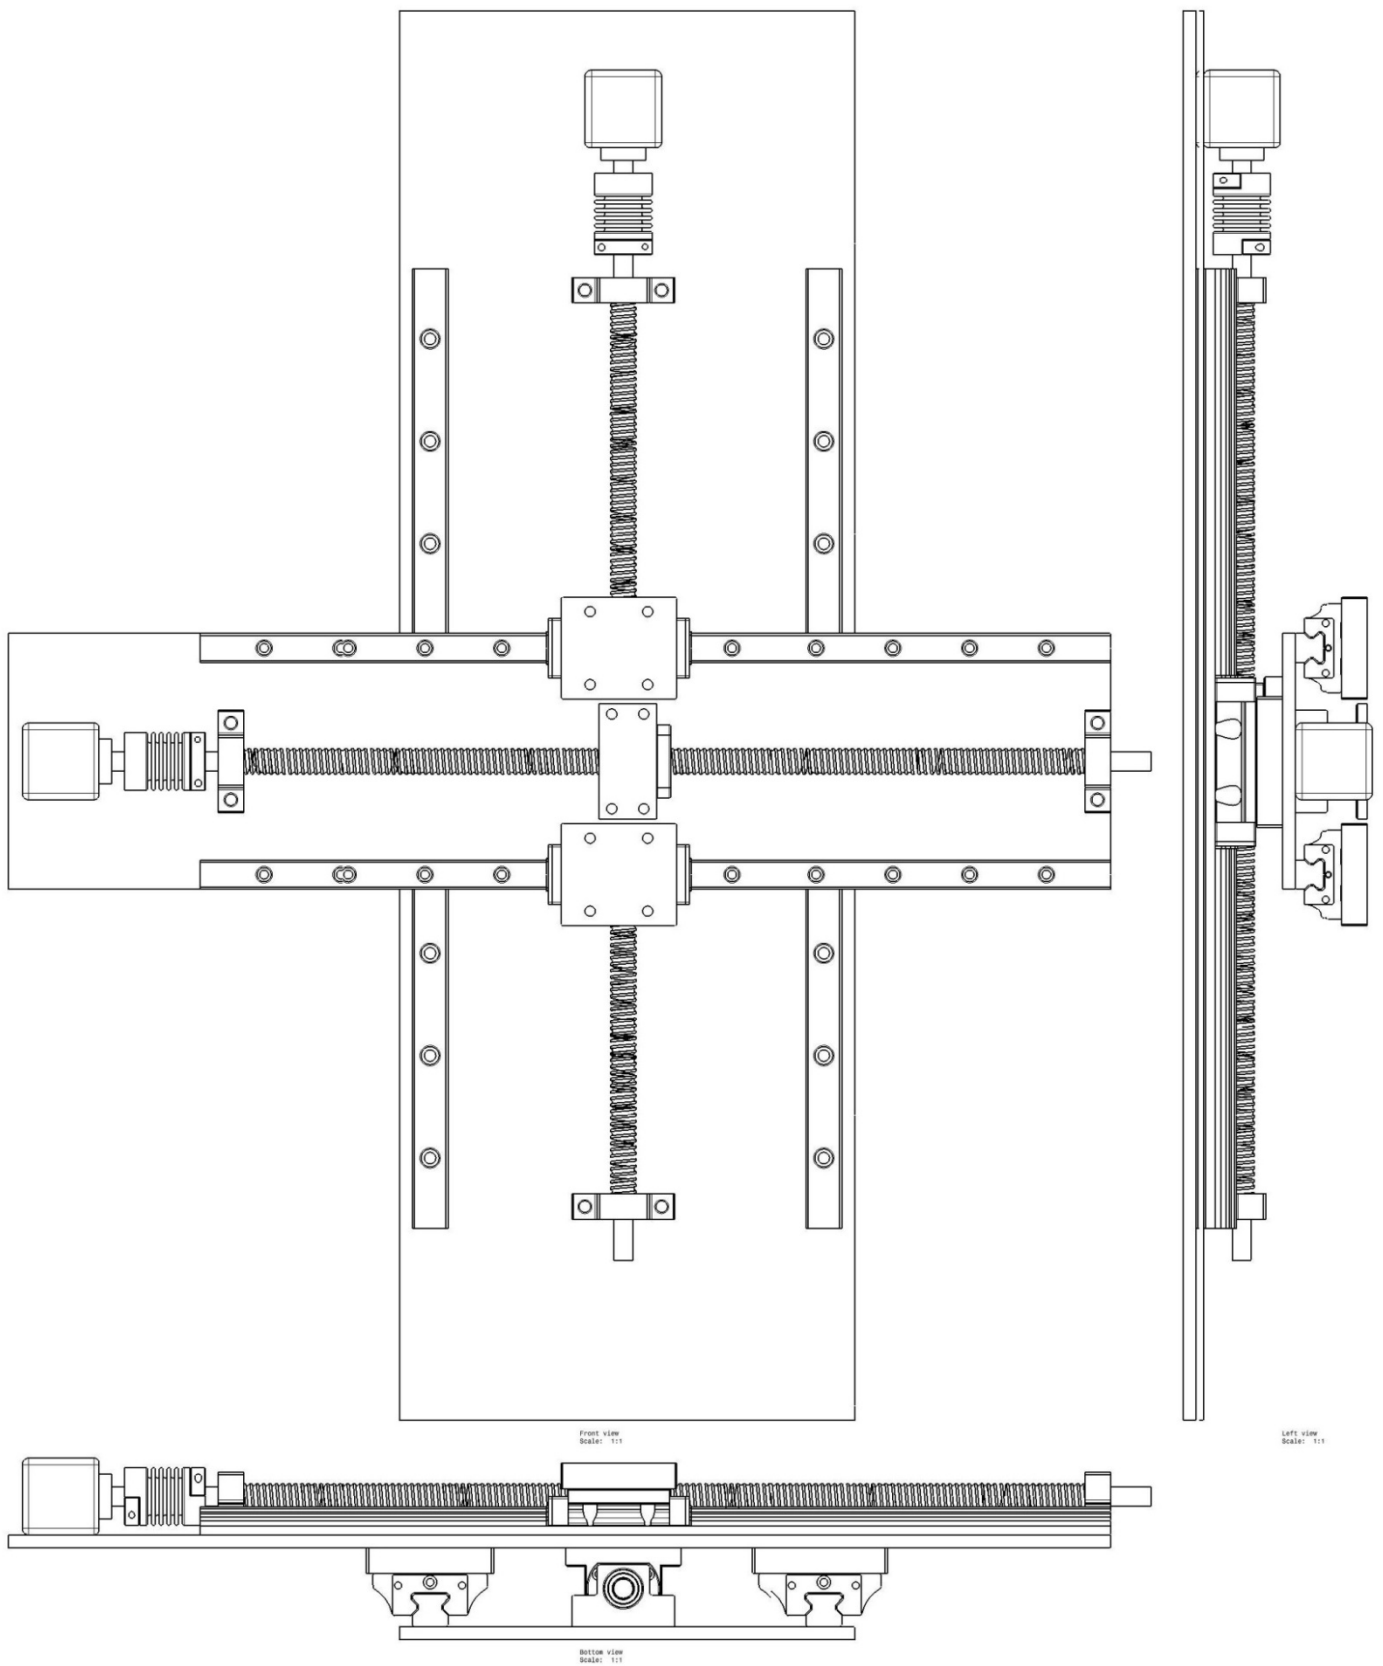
X-Y TABLE ASSEMBLY (2-D VIEWS)
